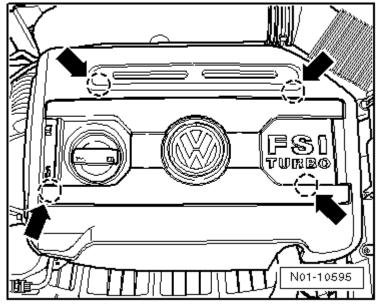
Identifying Engine Cover Attachment Points Courtesy of VOLKSWAGEN UNITED STATES, INC.
